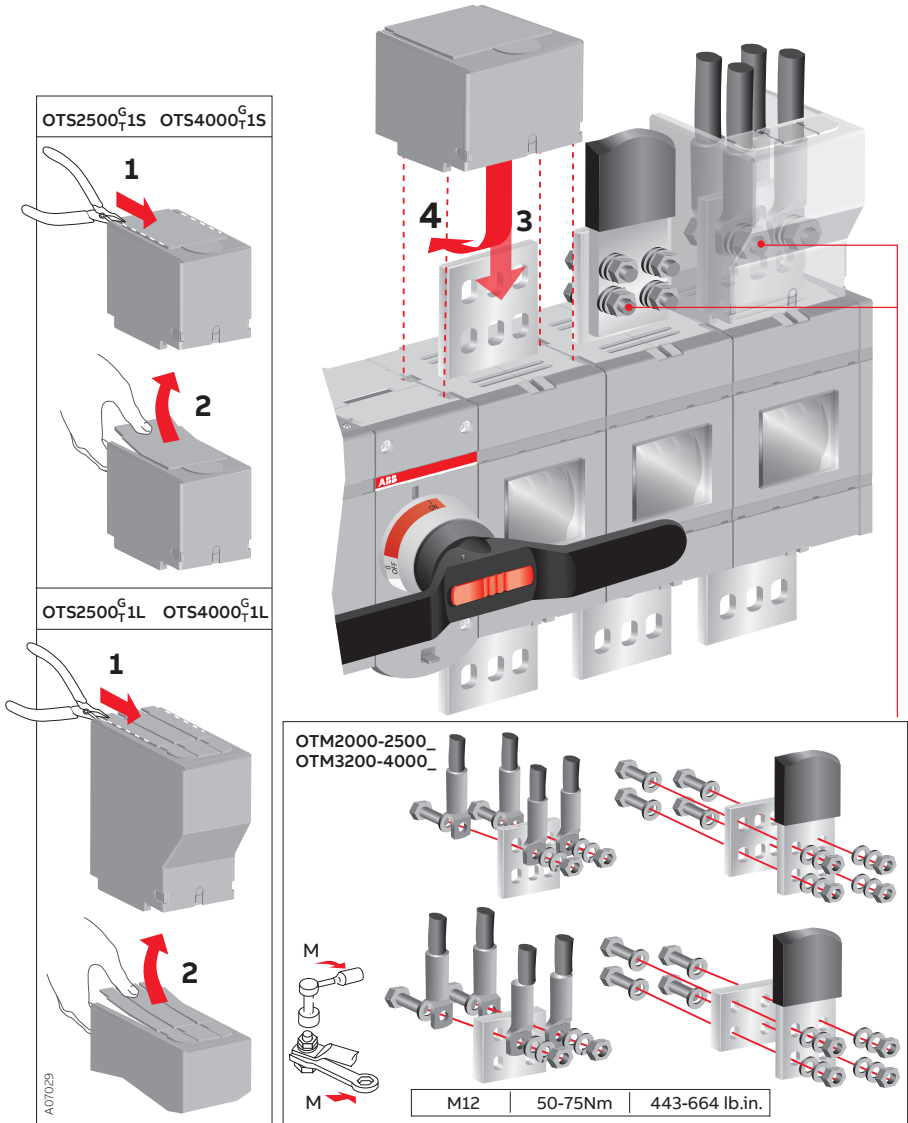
Mounting of the terminal shrouds (type OTS_) to the motorized switch-disconnectors OTM2000-2500E_ and OTM3200-4000E
